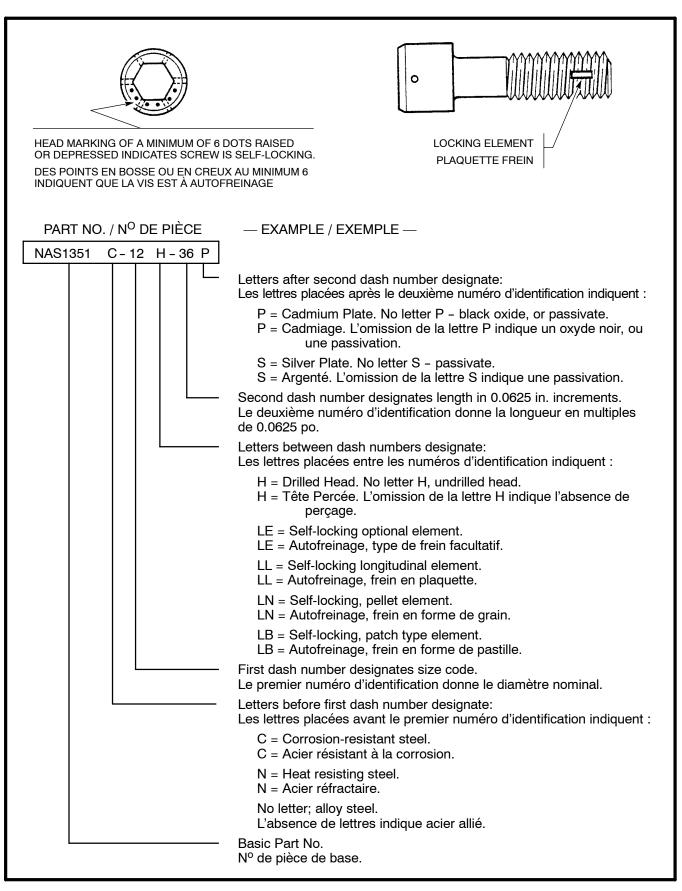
(Sheet 1 of 2) Screw, Cap, Socket Head, Self-Locking, NAS1351
